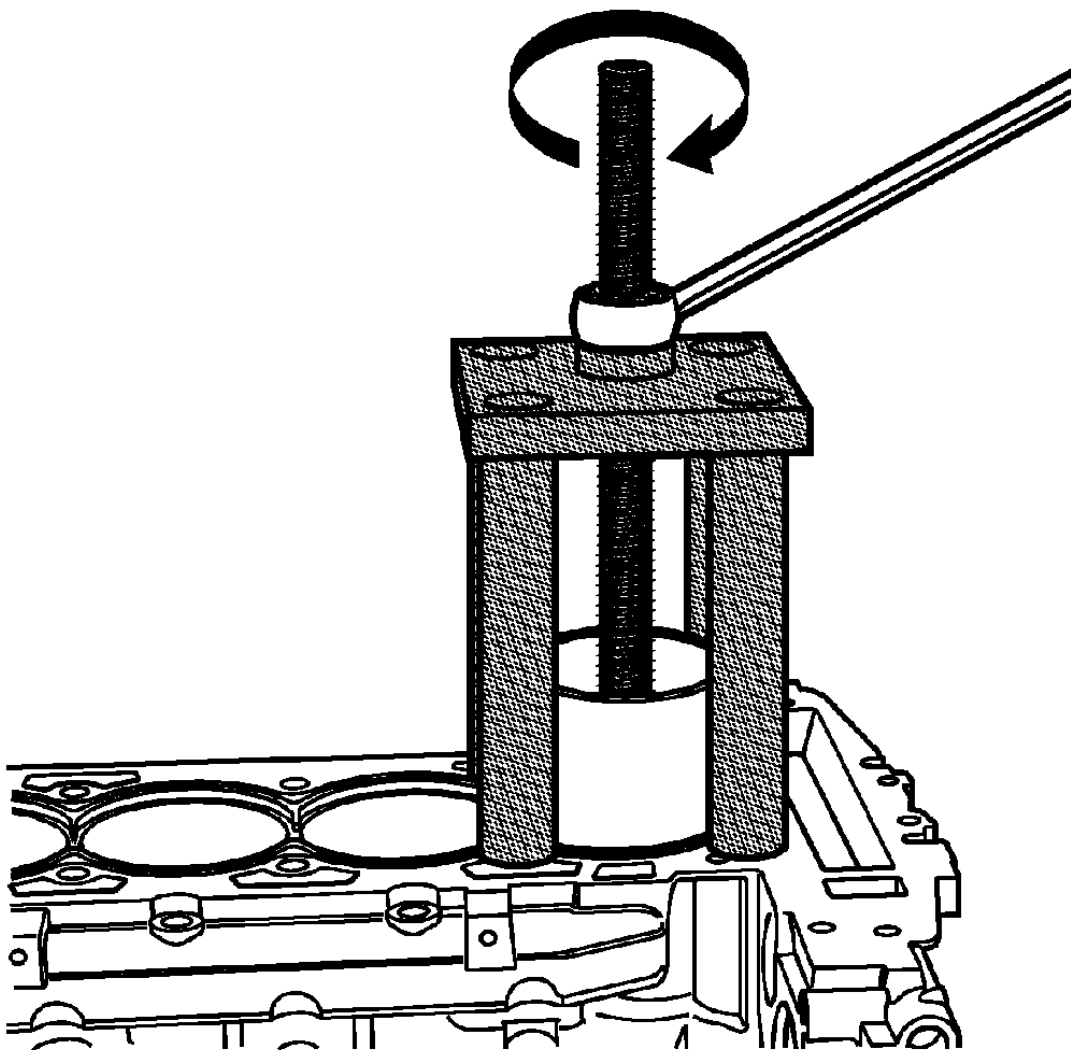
Removing Cylinder Bore Sleeve By Rotating Nut
